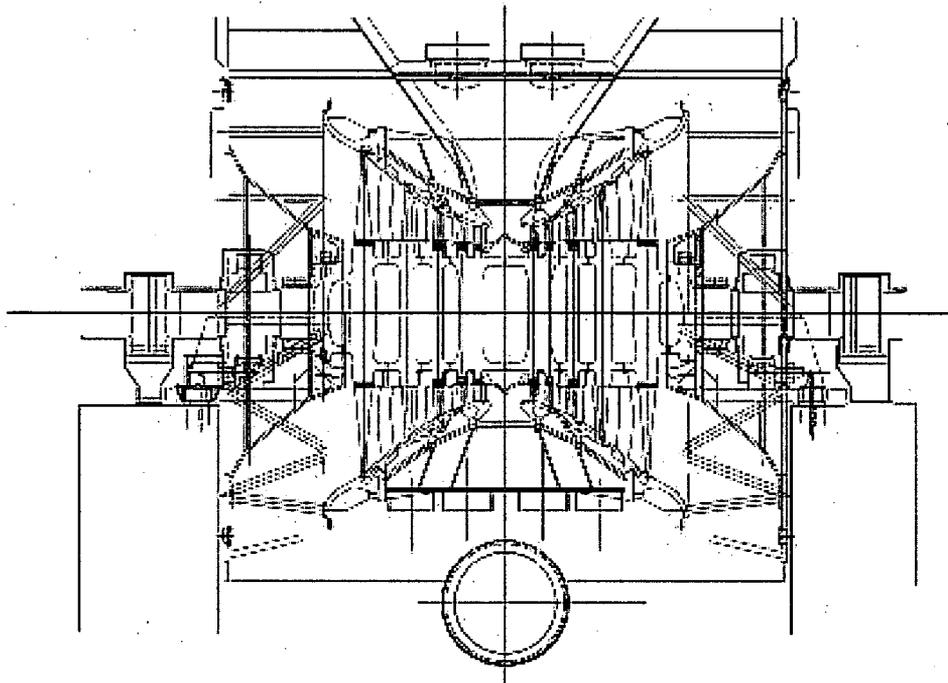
Cross section of the welded LP rotor for UNISTAR
